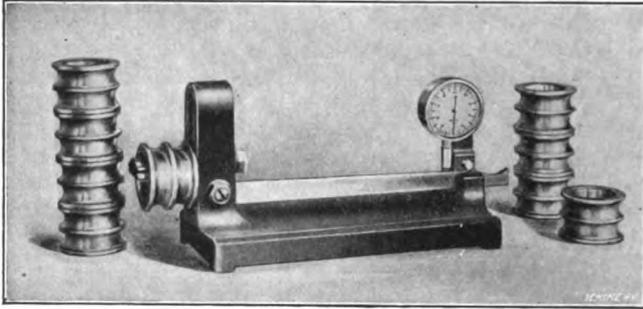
Internal Gaging Fixture for Ball Bearing Races
